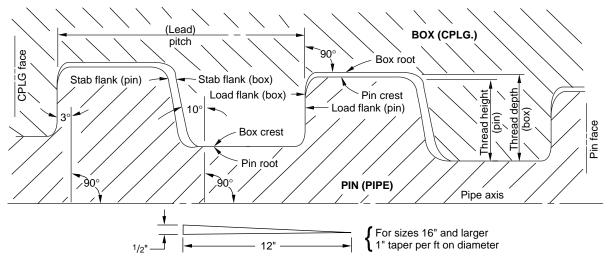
Buttress Thread Configuration for 16-in. OD and Larger Casing
